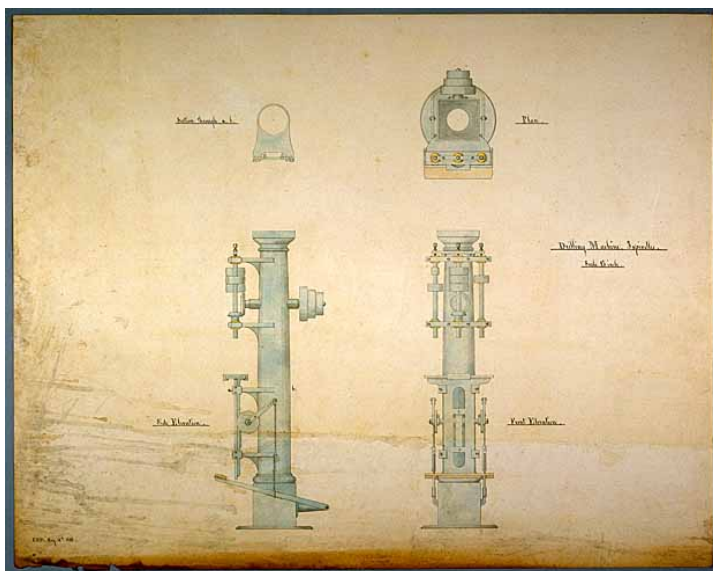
Drawing of drilling machine with three spindles, by James H. Burton, August 16, 1852. NPS Collection.
